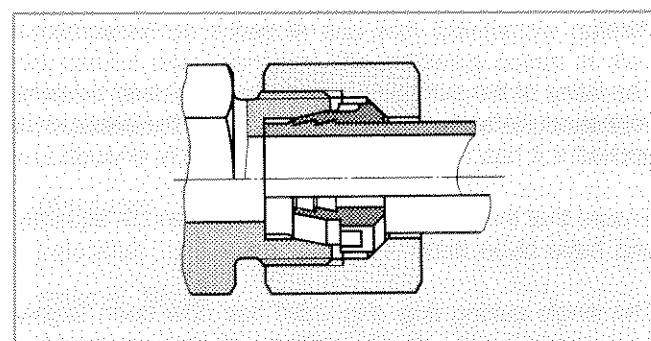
Double cutting ring with reinforced shoulder, metal-to-metal seal, securing function by two edges, more fitting force needed than the single cutting ring
